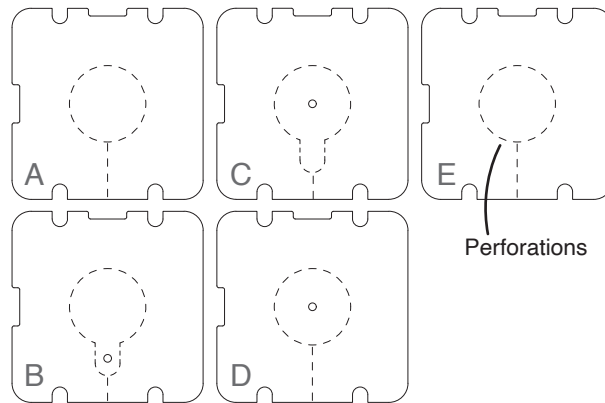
The cut patterns for the 0.15 mm thick TPU sheets is shown. Each pattern has notches for alignment with a 3D printed guide during fabrication. Perforations are cut into the sheet in the shape of the final dimensions. After fabrication on the 3D printer, the patterns can be torn manually along the perforations to achieve the final shape.
